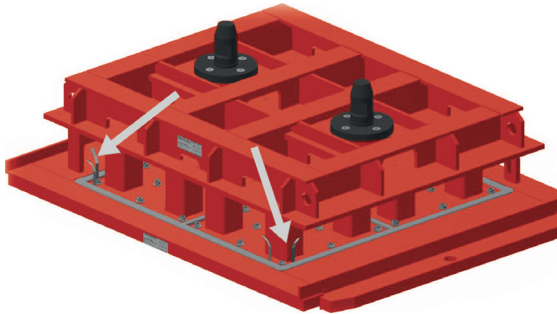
Method of checking of the mold centring, using feeler gauges.
